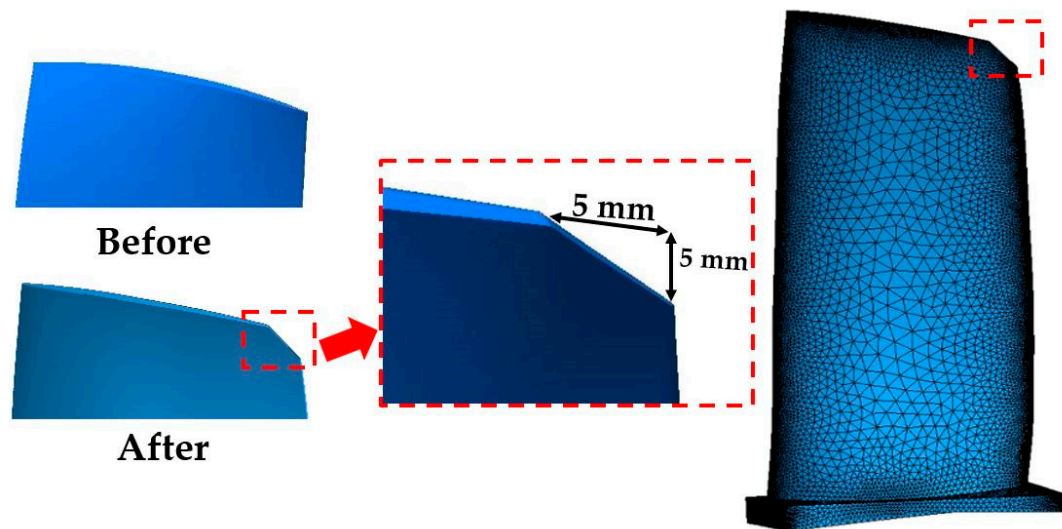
Shape of a rotating axial compressor blade and surface mesh model.
